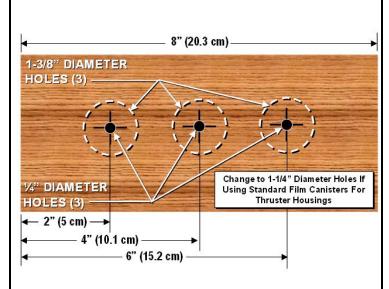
Typical Hole Spacing for a Potting Holder
